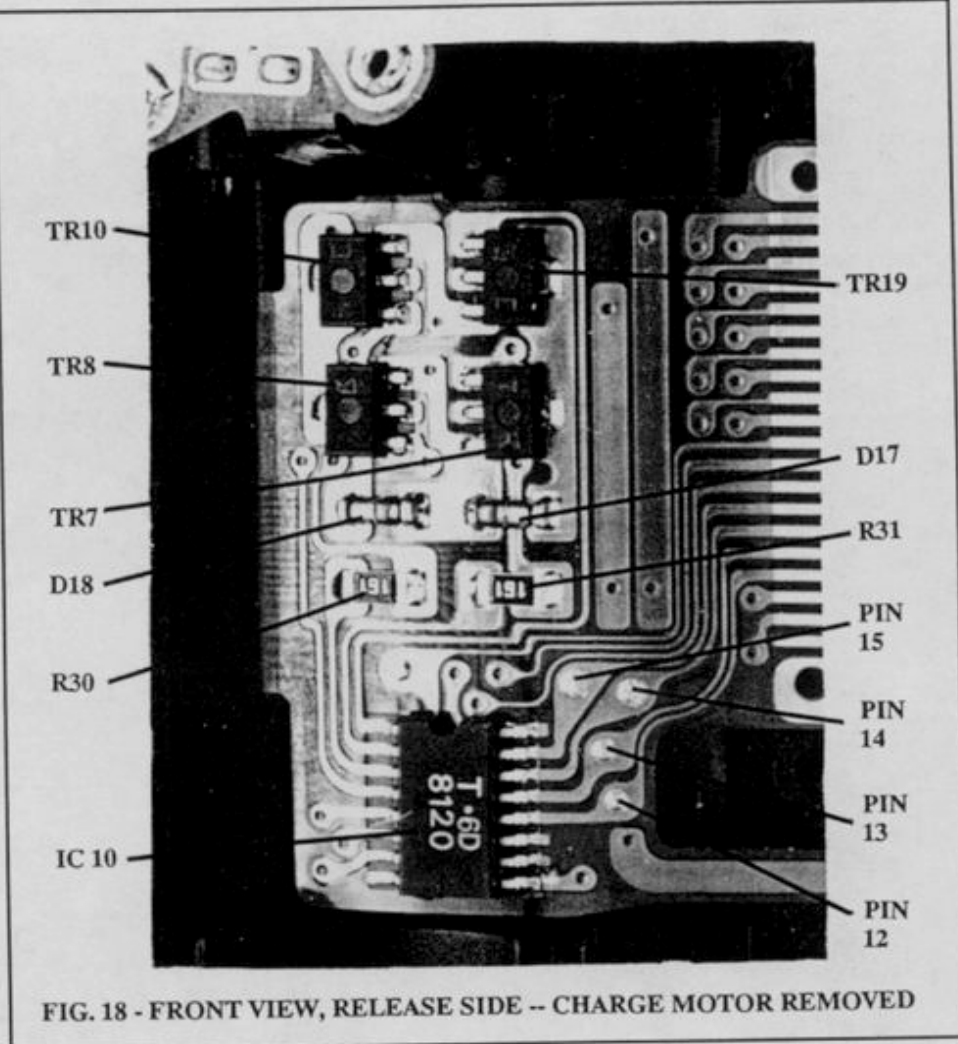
FRONT VIEW, RELEASE SIDE -- CHARGE MOTOR REMOVED
